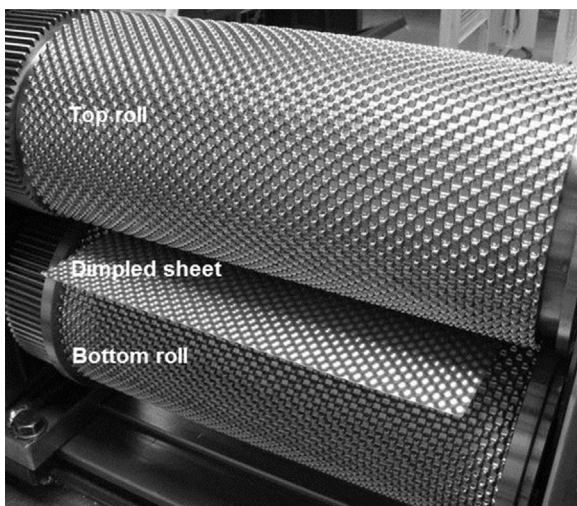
The UltraSTEEL process and dimpled steel sheet [24].
